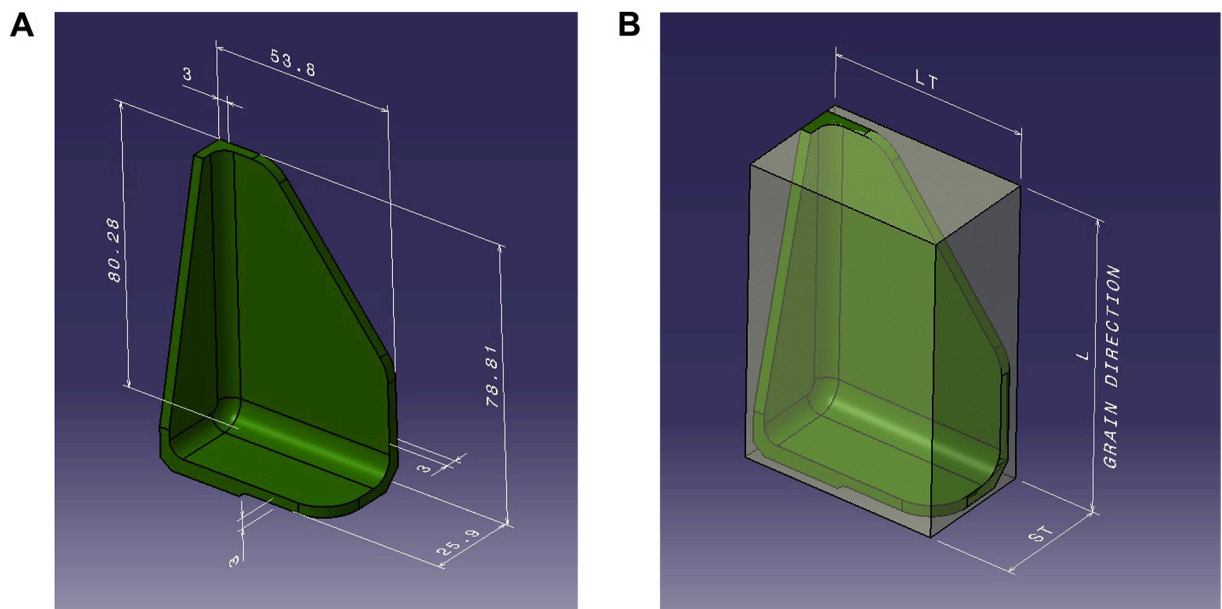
Reinforcement fittings: (a) general dimensions and (b) material orientation (all units in mm).
